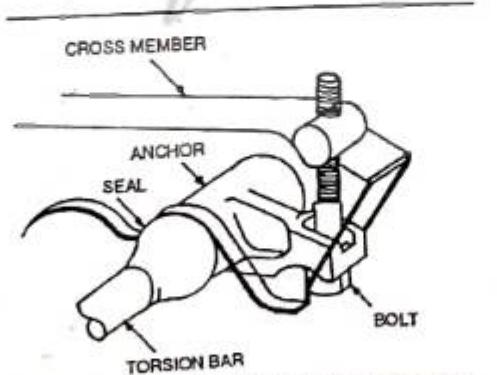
Torsion bar, rear anchor and adjusting mechanism.
